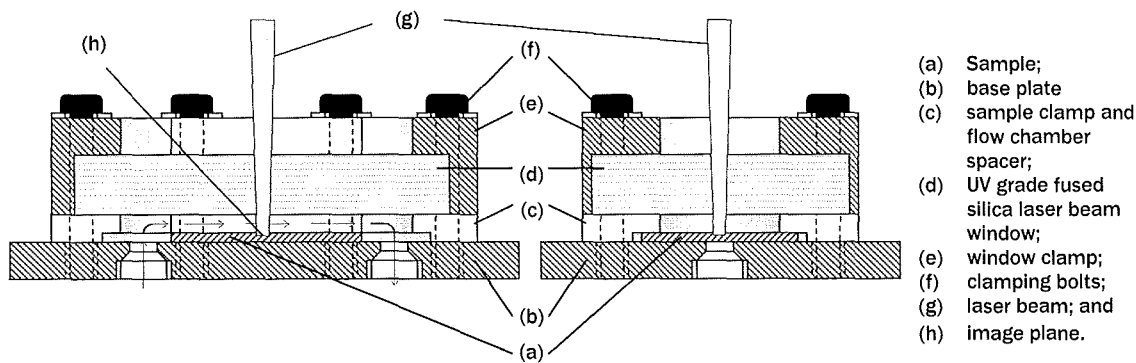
Cross-sectional assembly diagram of the closed thick film flowing liquid immersion ablation sample chamber assembly.
